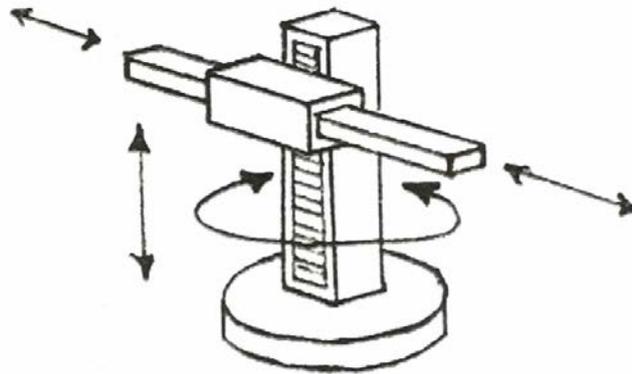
Cylindrical Geometric Robot: used in pick and place and assembly etc
